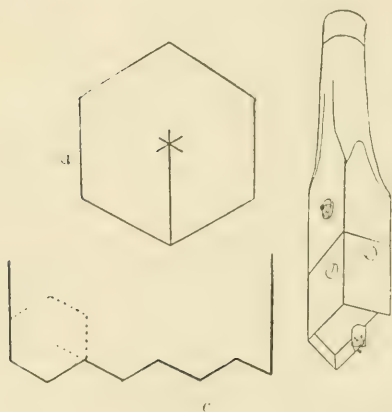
a*, tarred felt card in outline one-third size; *b*, tool for cutting cards, about one-sixth size; *c*, showing how tool is used, dotted line indicating position of edge of tool. (After Goff.)
